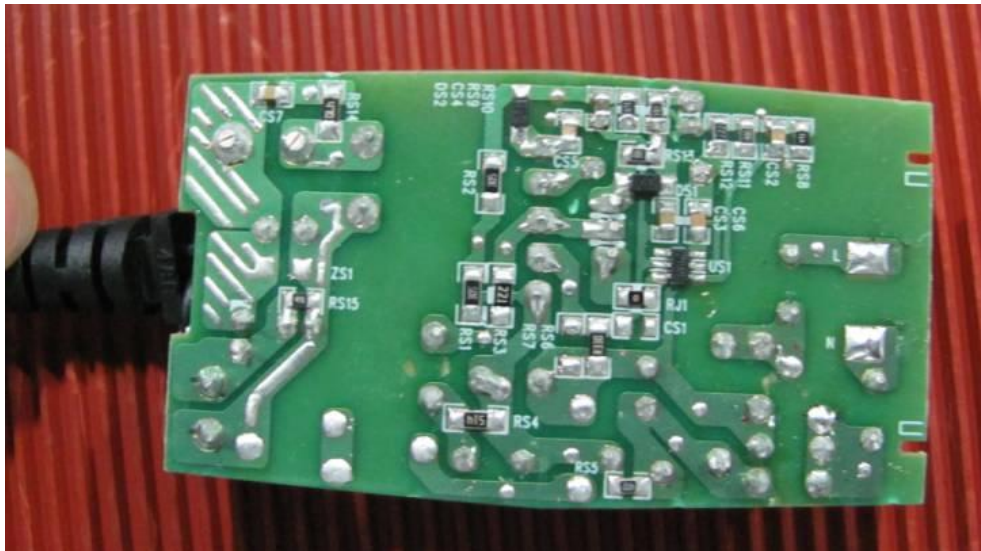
COMPONENT SIDE VIEW OF OPEN FRAME MODEL
